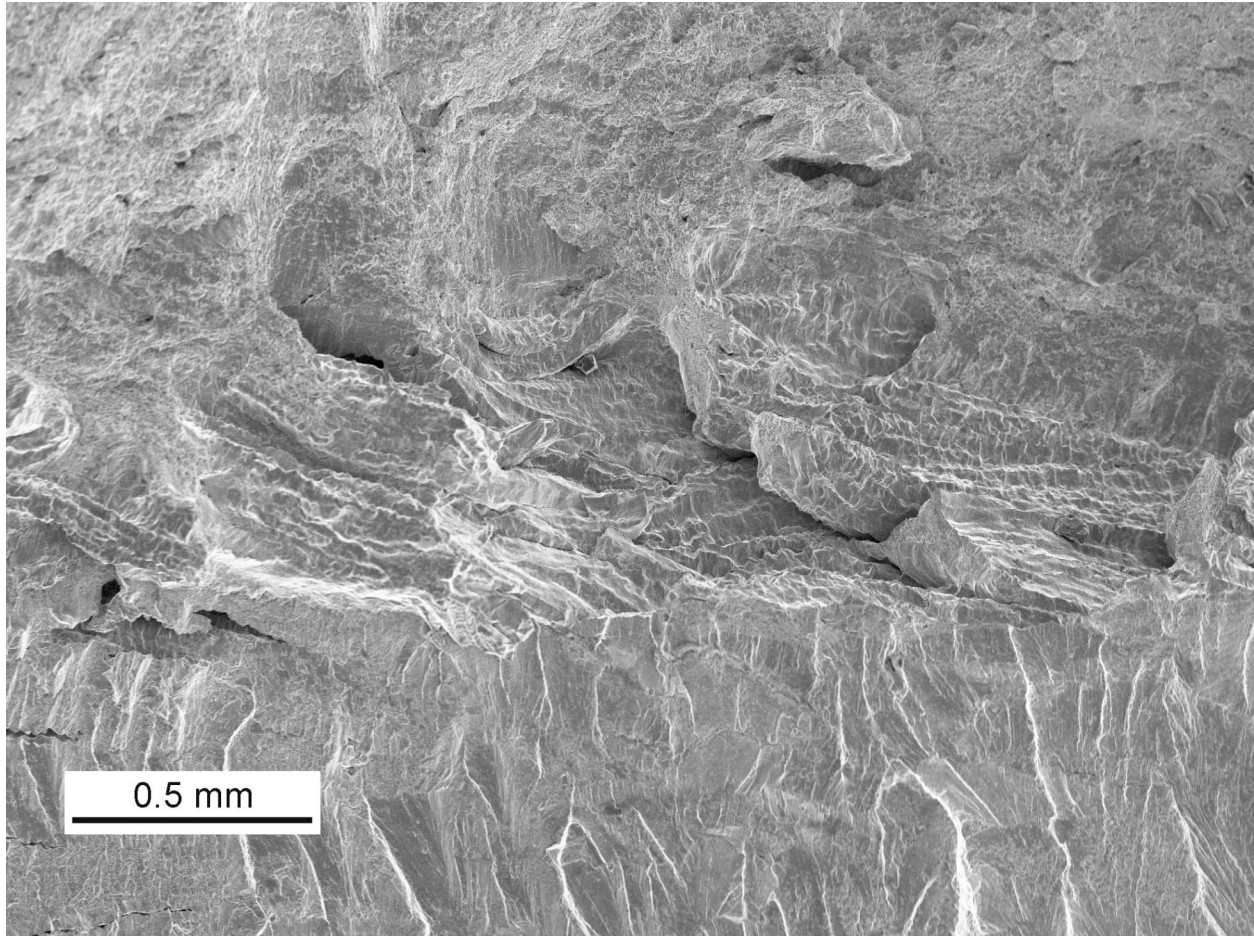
Higher magnification image of IG fracture on the Alloy 182 weld specimen CT933-TL resulting from the constant load period CL-5 (test period 20). Crack extension from bottom to top of the figure.
